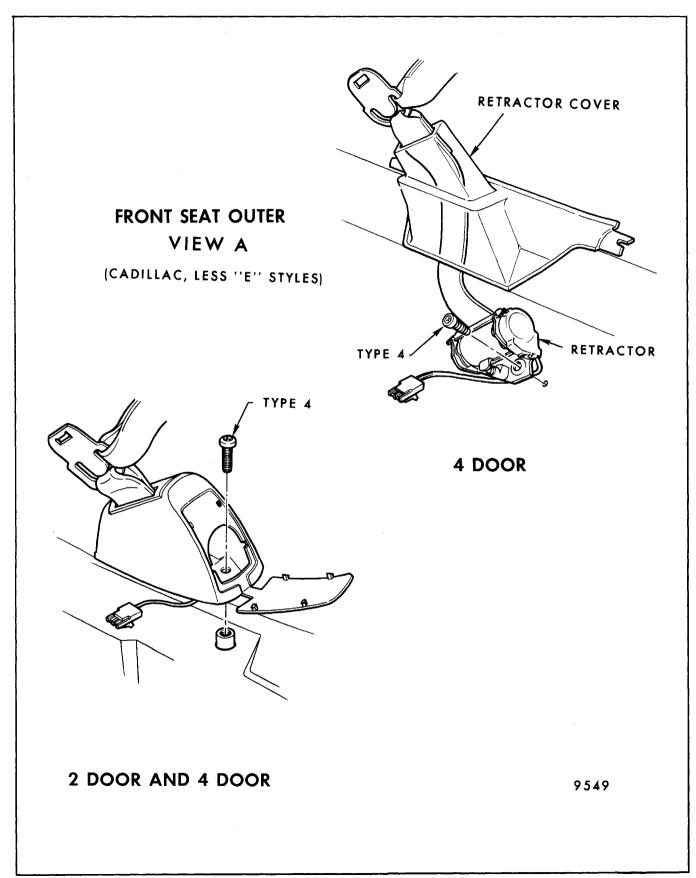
Front Seat Outer Lap Belts and Retractors - Cadillac Styles, Less E Styles
